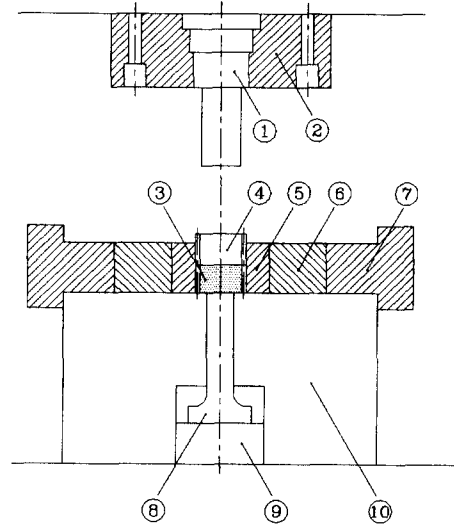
Die design schematics for the gear forging⁽⁷⁾
